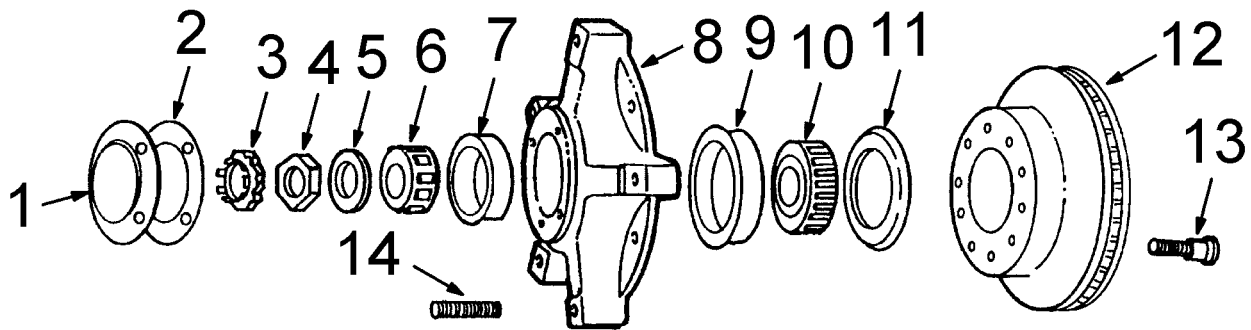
Remove Front Rotor And Wheel Hub Assembly
